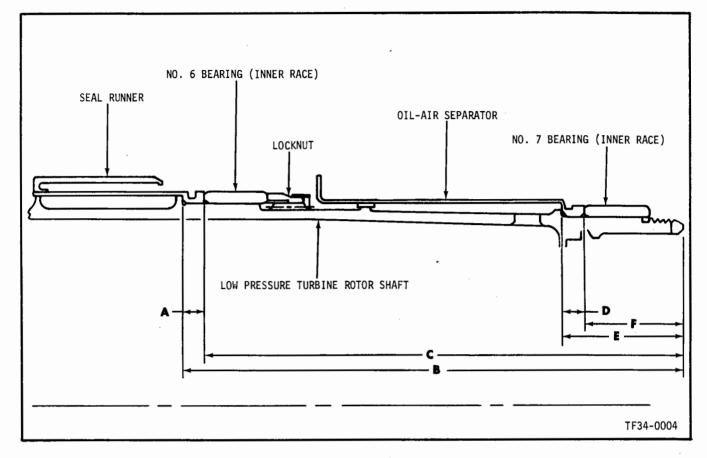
No. 6 Seal Runner and Oil/Air Separator Seating Checks
